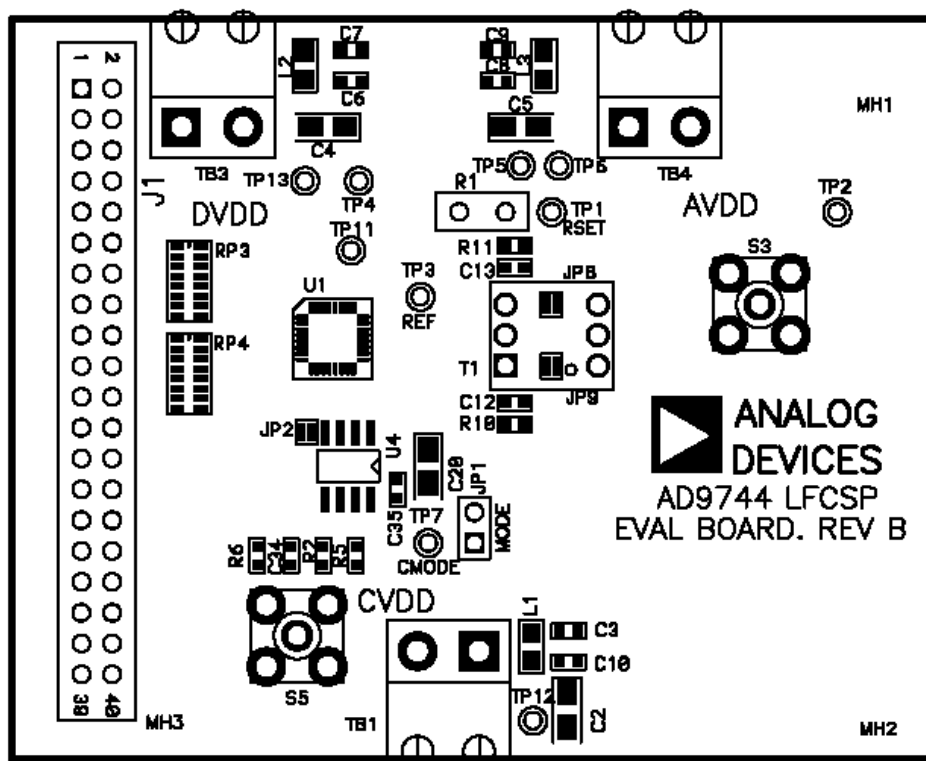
LFCSP Evaluation Board Layout Assembly—Primary Side
